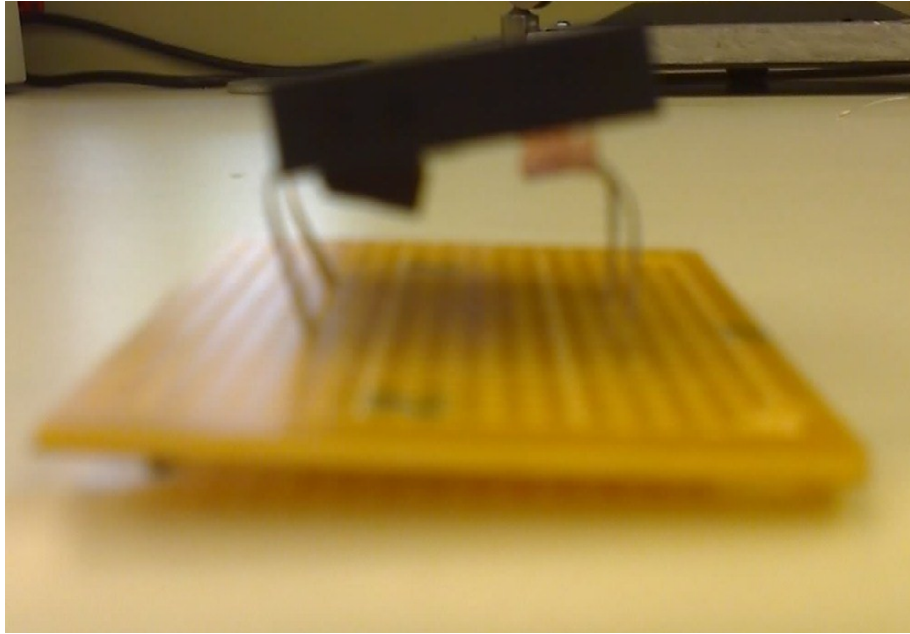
Prototype 1 with IR emitting diodes (right) and 38kHz IR receivers (left) mounted to PCB (bottom) and channeled with a machined part (top). Better image of machined part may be seen in figure A
